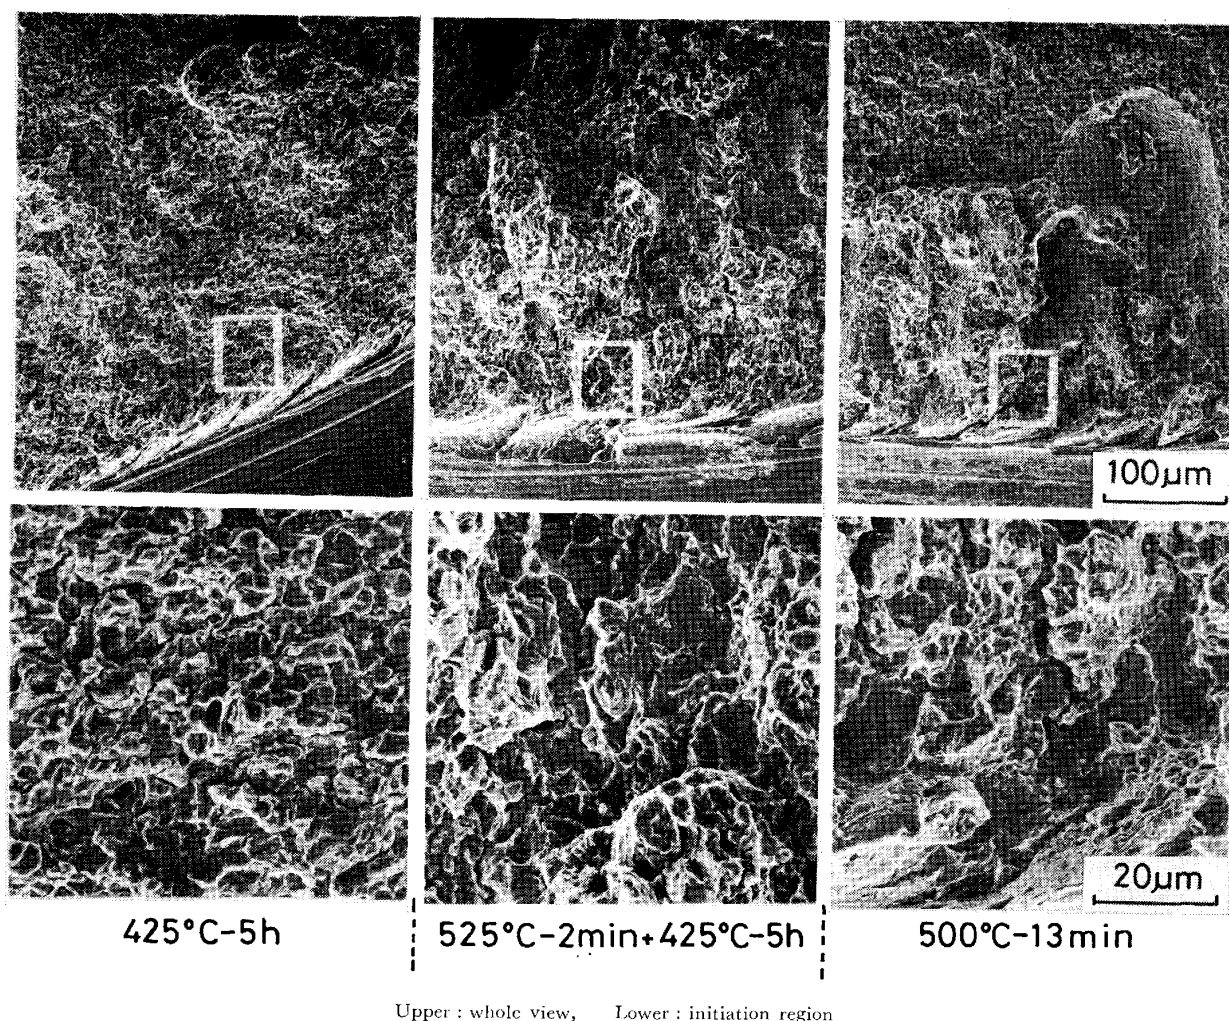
Fracture surfaces of notch tensile specimens tested in 2.2 Torr hydrogen.
